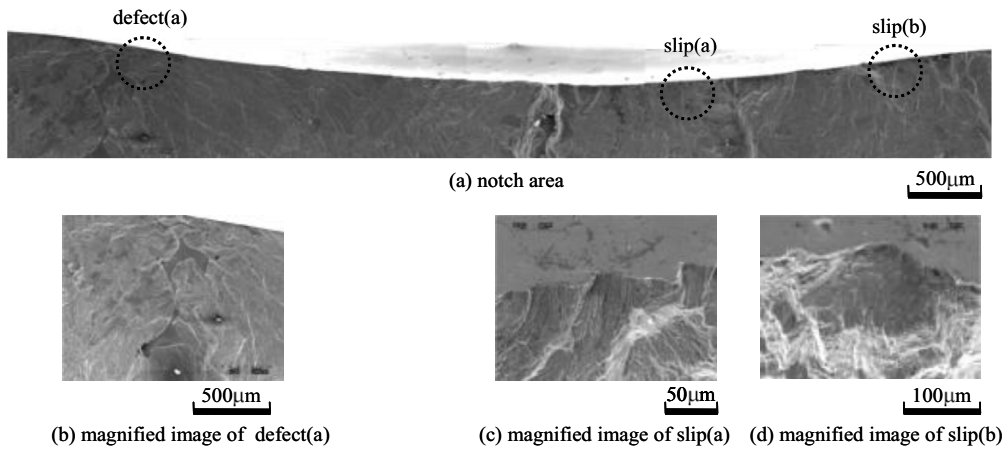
Fracture surface of plane bending test (slip and defect origin type) [380MPa,  $N_f=1.2 \times 10^6$  cycles]
